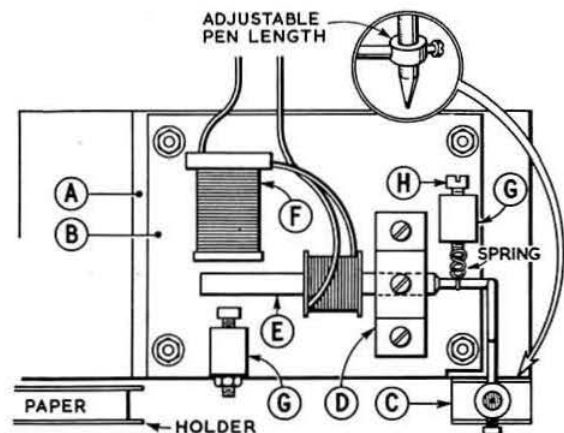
Layout of the pen armature and coils. The parts keyed are shown in detail in Fig. 7.
